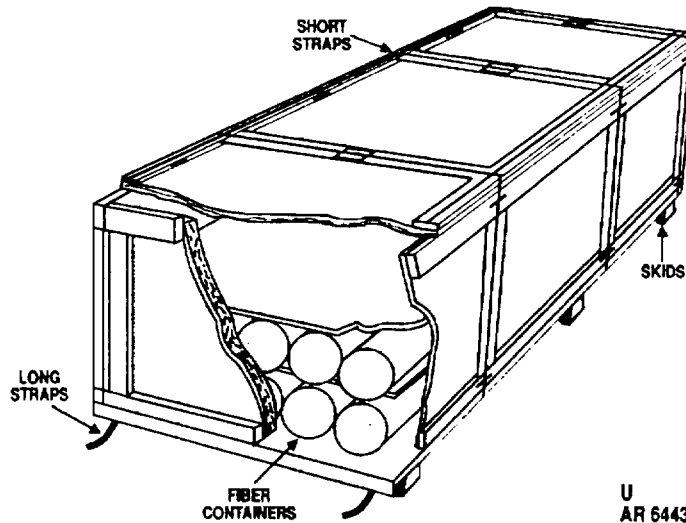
Packing Of 25 Assembled 2.75-Inch Rockets.
